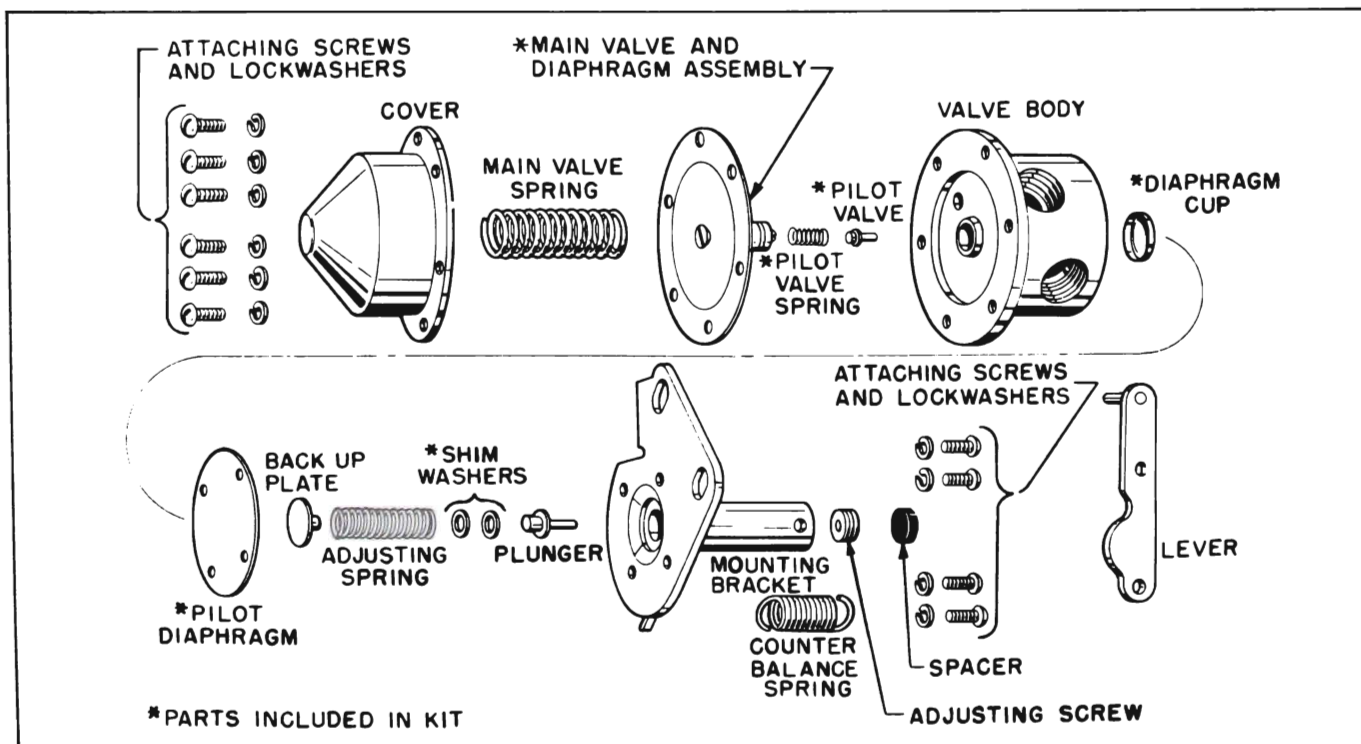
Exploded View of Hot Gas By-Pass Valve
